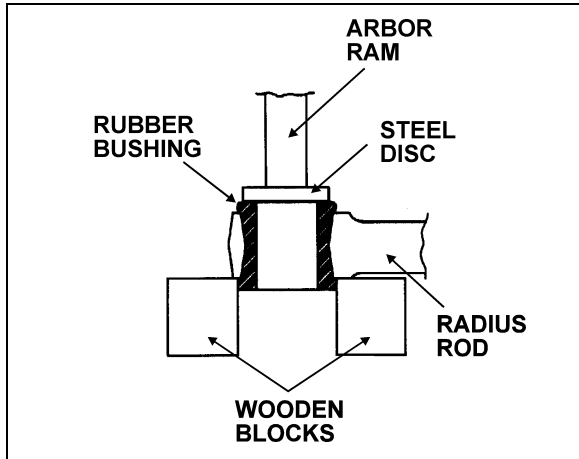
RADIUS ROD BUSHING REMOVAL 16011
